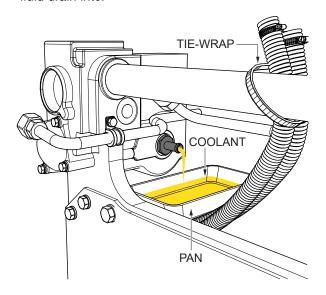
DEF Tank 1/2" Hose Removal Engine Block Side
